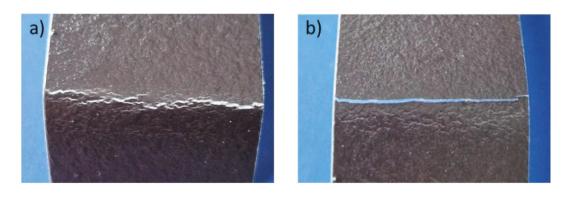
TCC damaged with many small cracks (a) and TCC damaged by a single crack (b).
